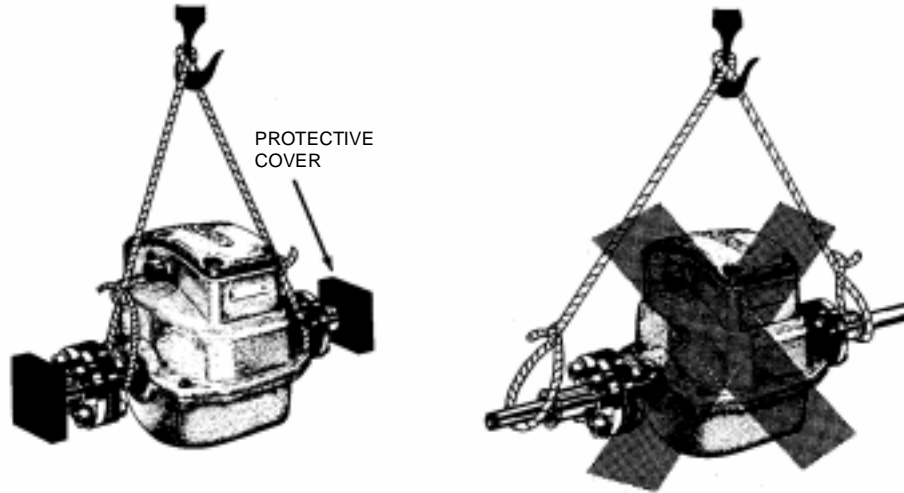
, Figure 3, and Figure 4 (horizontal lifting), the suggested approach is to place the lifting rope between the flange and flowtube body. For vertical lifting, shown in Figure 5, the use of eye bolts in the flange to which the lifting rope is attached is the preferred method. This ensures that the lifting force is applied to the eye bolts as nearly straight upward as possible.
